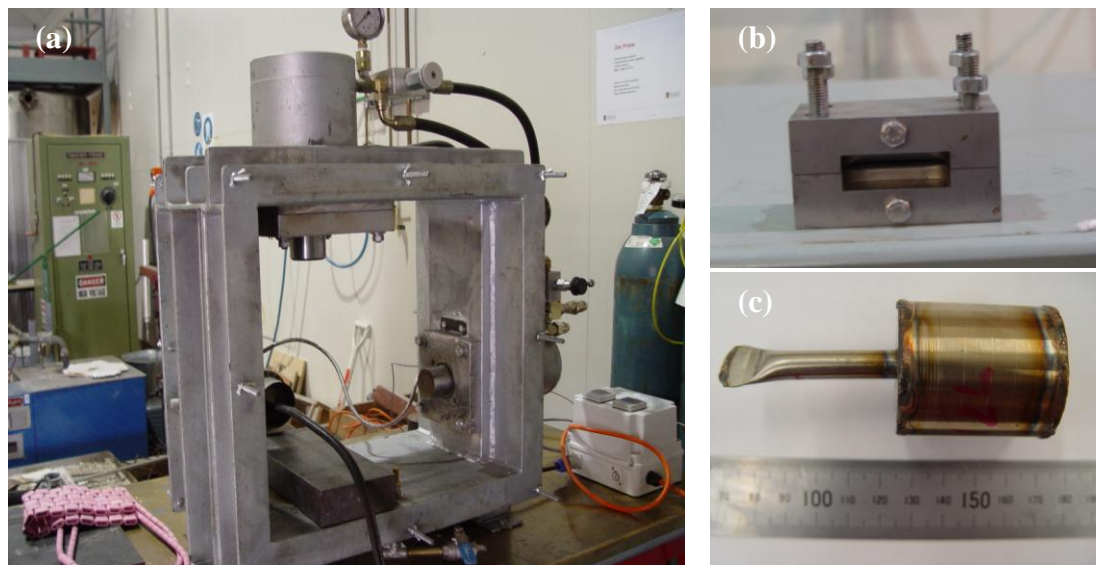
(a) the set up used for degassing of the canned compacts; (b) fixture used to crimp the tube of the can in order to seal it, and; (c) sealed can after welding ready for consolidation.
